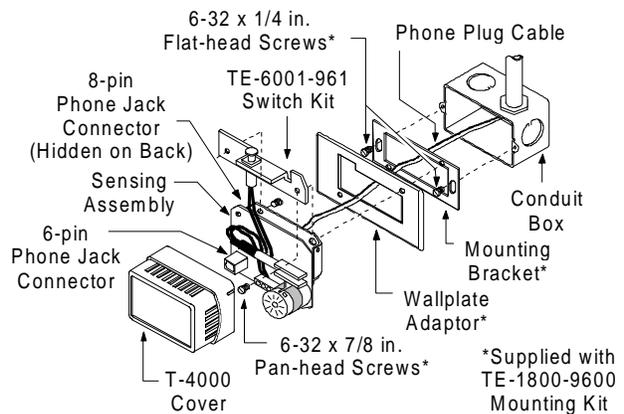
TE-6100-11 and -12 Installation on a Handi-box with TE-1800-9600 Mounting Kit (Horizontal Mounting Shown)
